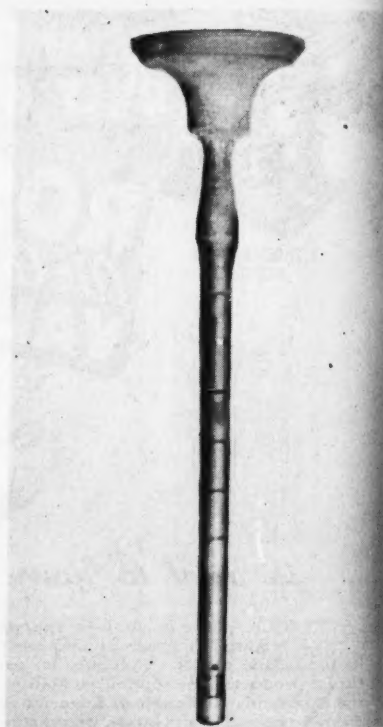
Badly-Burned Exhaust Valve for Oilfield Engine
